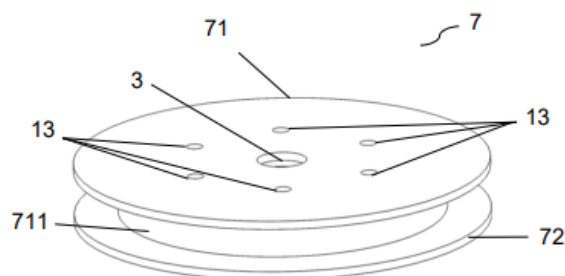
An exemplary cross-sectional view of the assembly of the winding spool in another embodiment of the invention.
